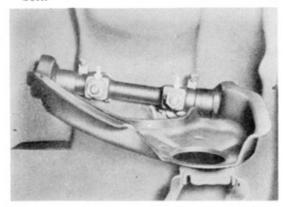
13 Removing Upper Suspension Arm Shaft Nuts
